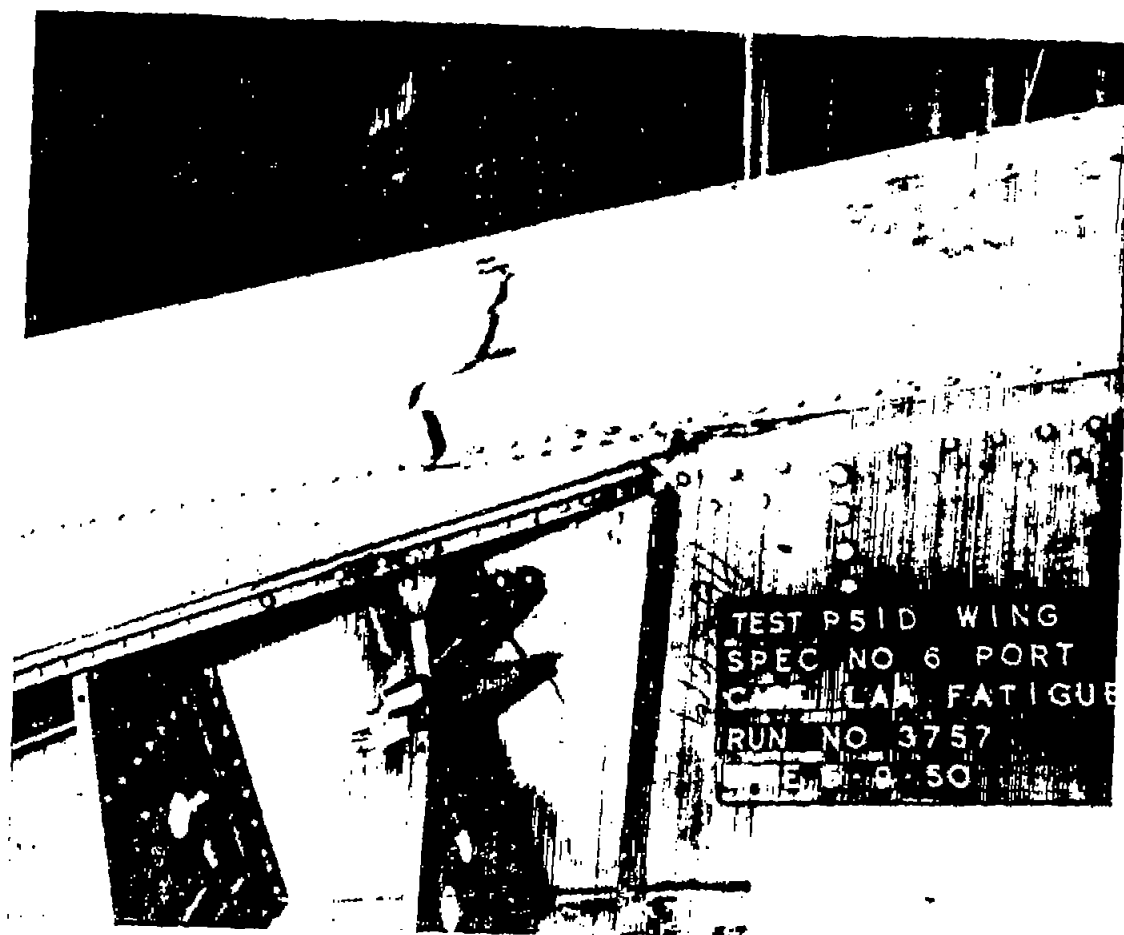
Failure at station 28 - type III. (Similar failures occur at station 21 - type II, and at station 30 - type V.)
